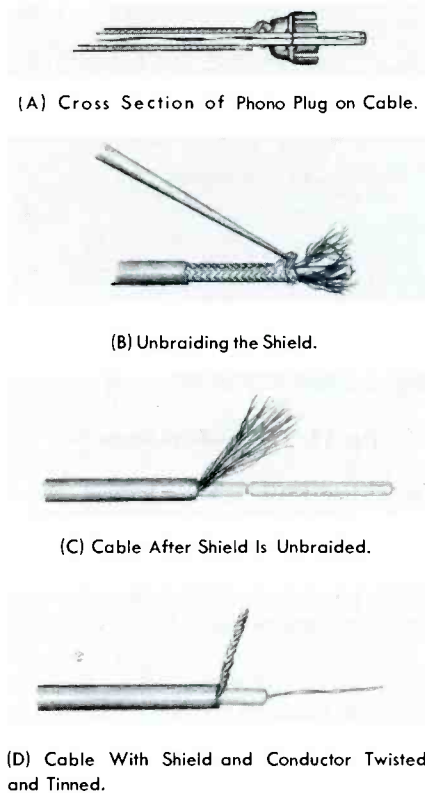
Assembly Steps in Attaching Phono Plug to Cable.
